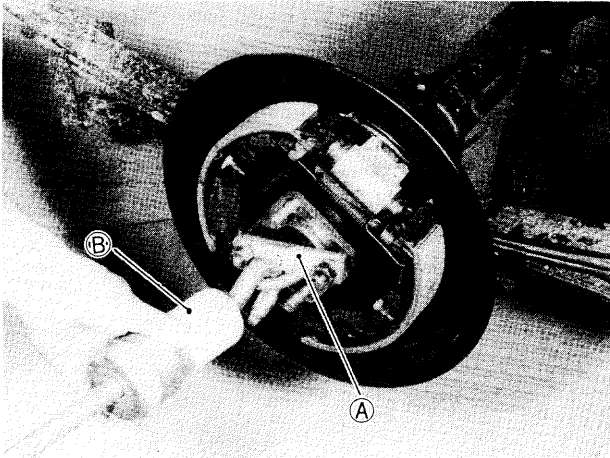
① *Special Tool (Rear Axle Remover 09922-66010)
